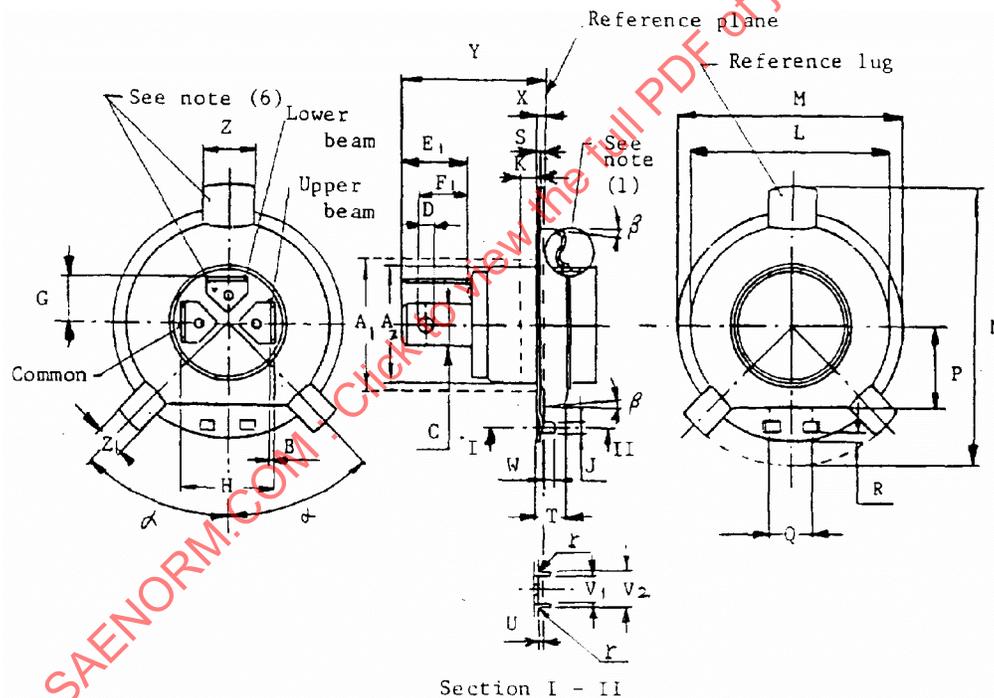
TYPE HS1 REPLACEABLE MOTORCYCLE HEADLAMP BULB—ASSEMBLED BASE PX43t-38 ON FINISHED BULB—DIMENSIONAL SPECIFICATIONS
